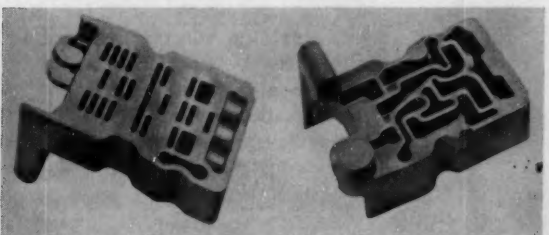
Valve body for the automatic transmission of a military vehicle. A dimensional tolerance of ± 0.005 -in. per in. is conventional for small shell castings.
